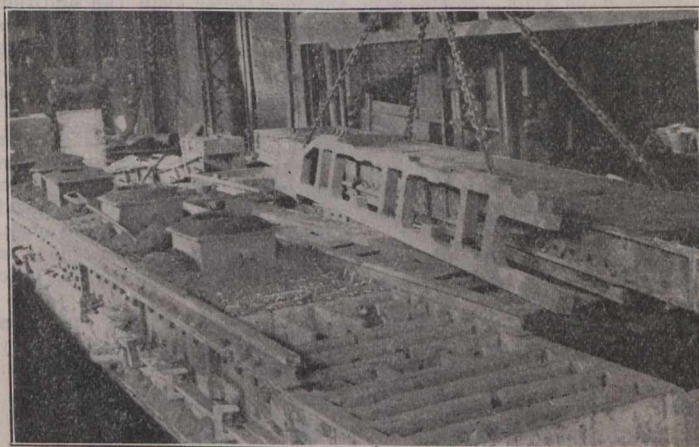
Cope and Flask with Drawn Pattern, and Mould ready to Pour.
